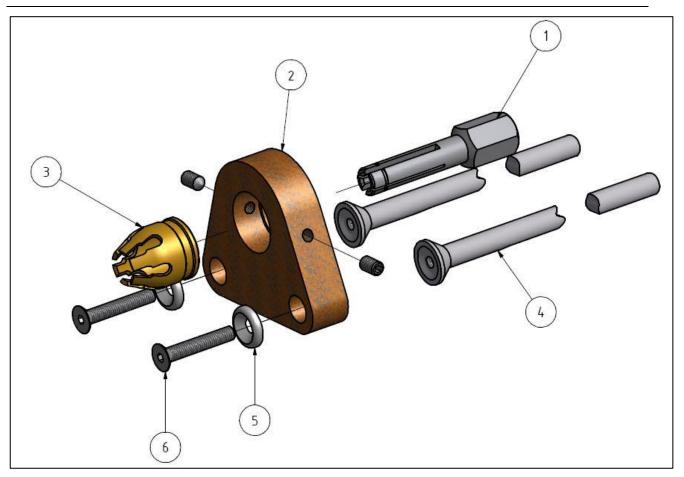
Gun accessories for welding of Fibrefix-pins Ø 5, Length L
